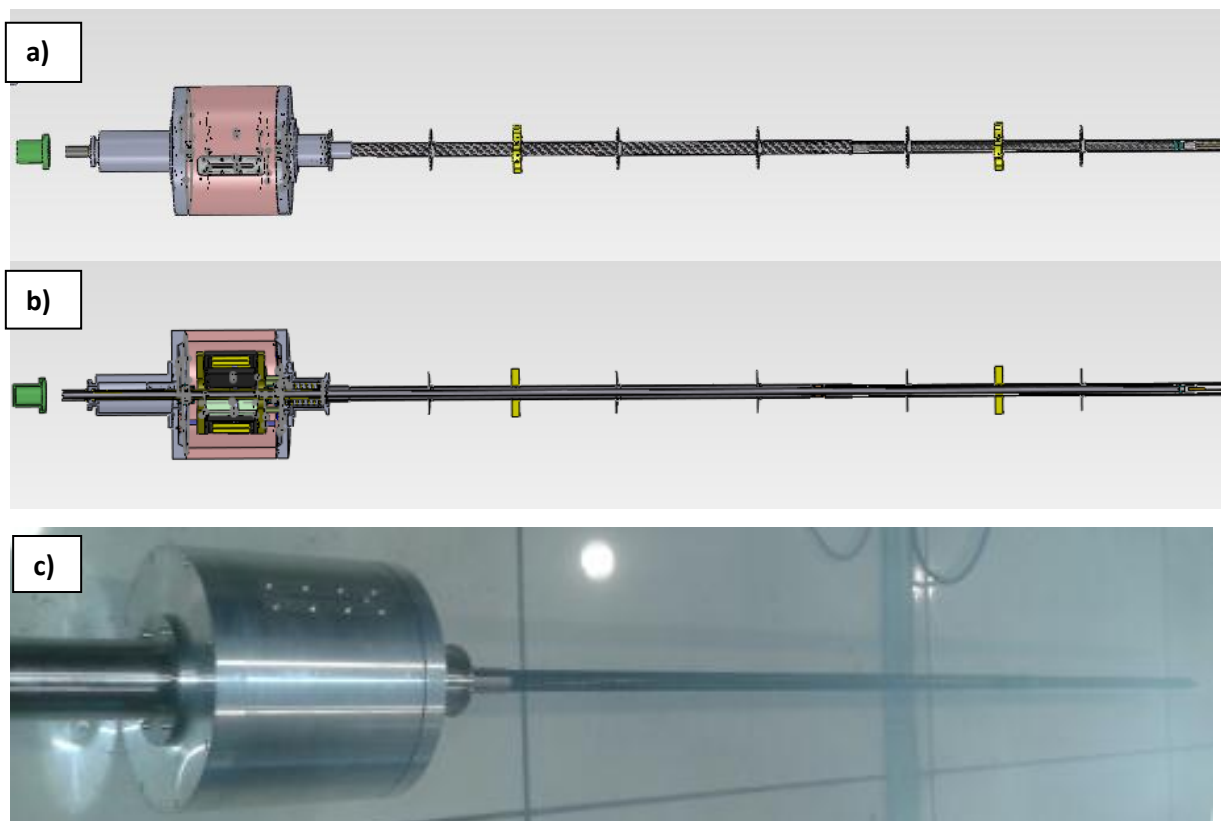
a) General view of CAD drawing of VSM system, b) Cross-sectional view of VSM system, c) real image after producing with extension of the probe rod.
